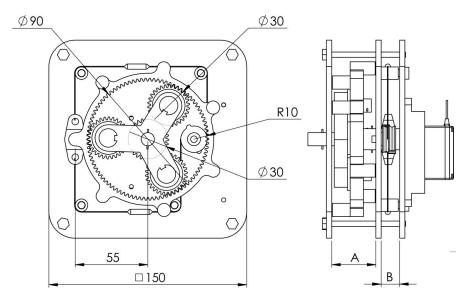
Proof-of-concept prototype showing its general dimensions in mm. The planetary gear is in the "A" layer and the stiffness control mechanism is in the "B" layer.
